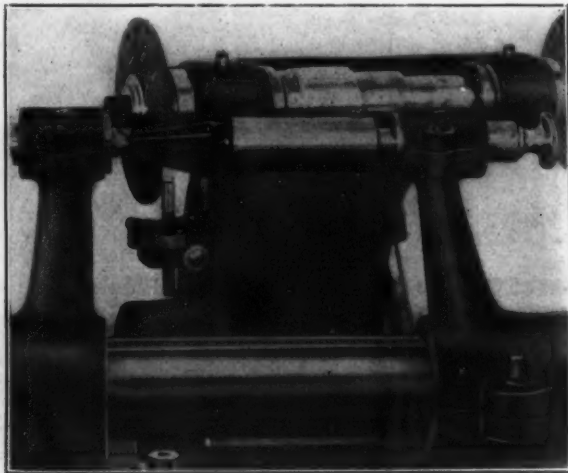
Showing a Bevel Mill Being Ground Between Centers at Left Hand Wheel.
